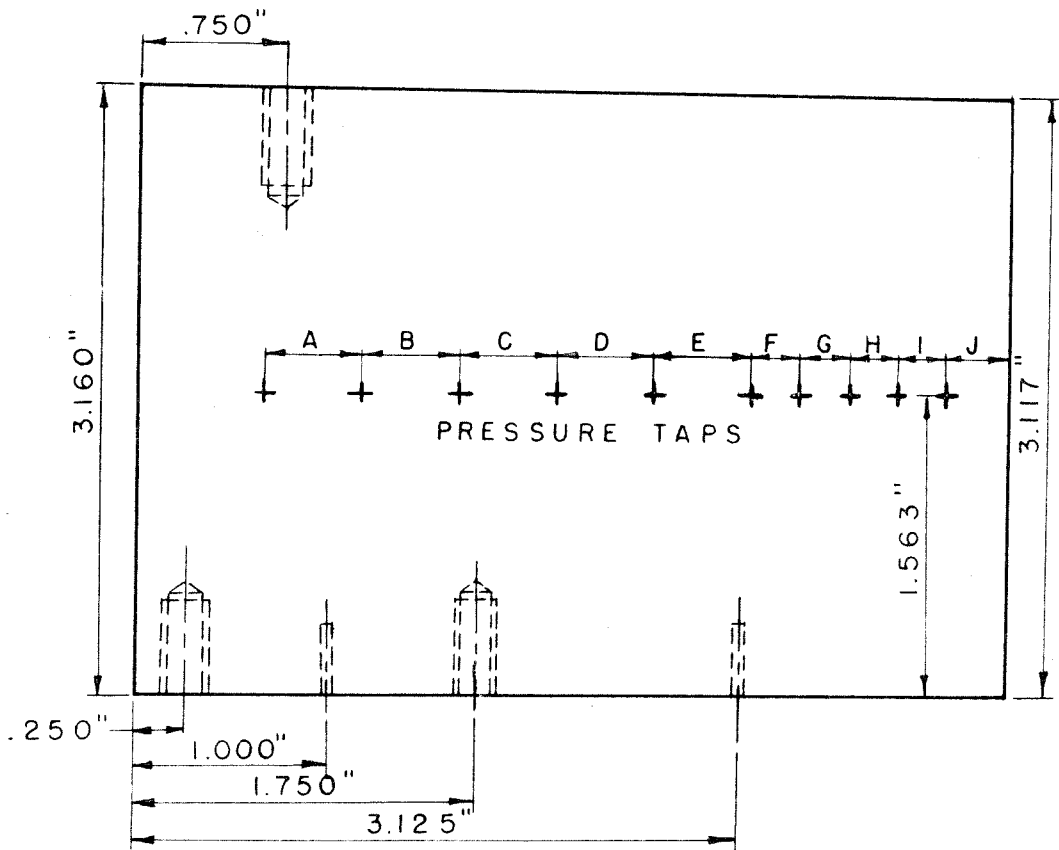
A side and bottom view of the wedge hydrofoil tested showing additional details of the construction and the location of the piezometer orifices.
